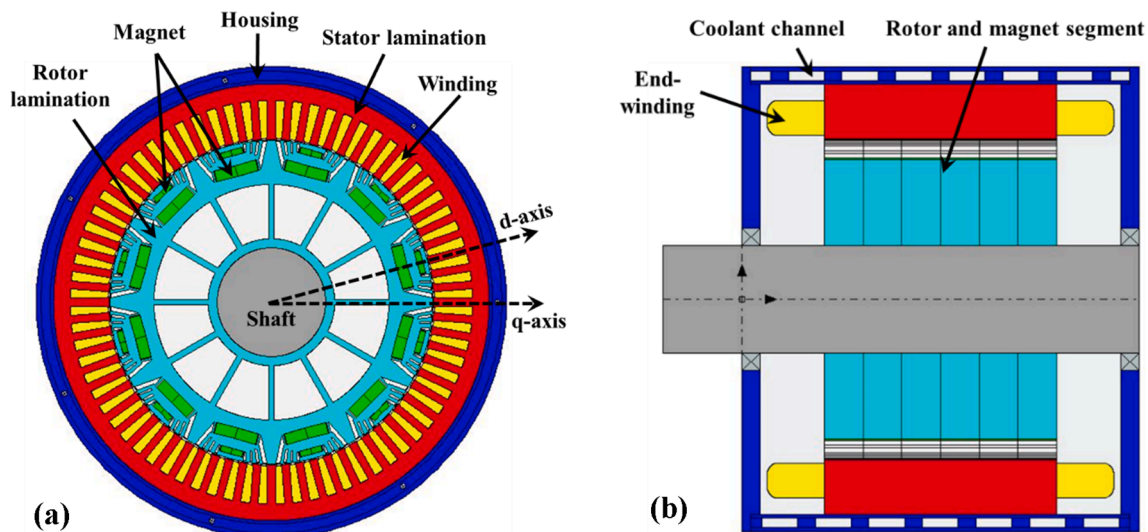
(a) Front view and (b) side view of jacket cooled BMW i3 motor.
